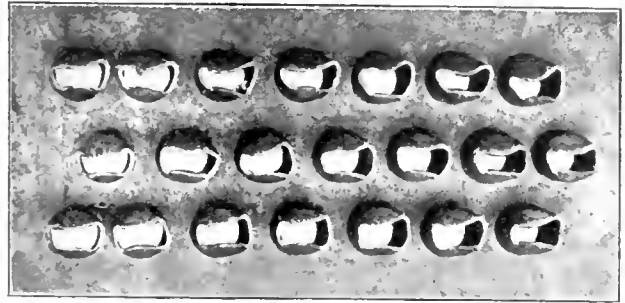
SMALL SECTION OF LOCOMOTIVE FLUE SHEET, TUBES WELDED.
